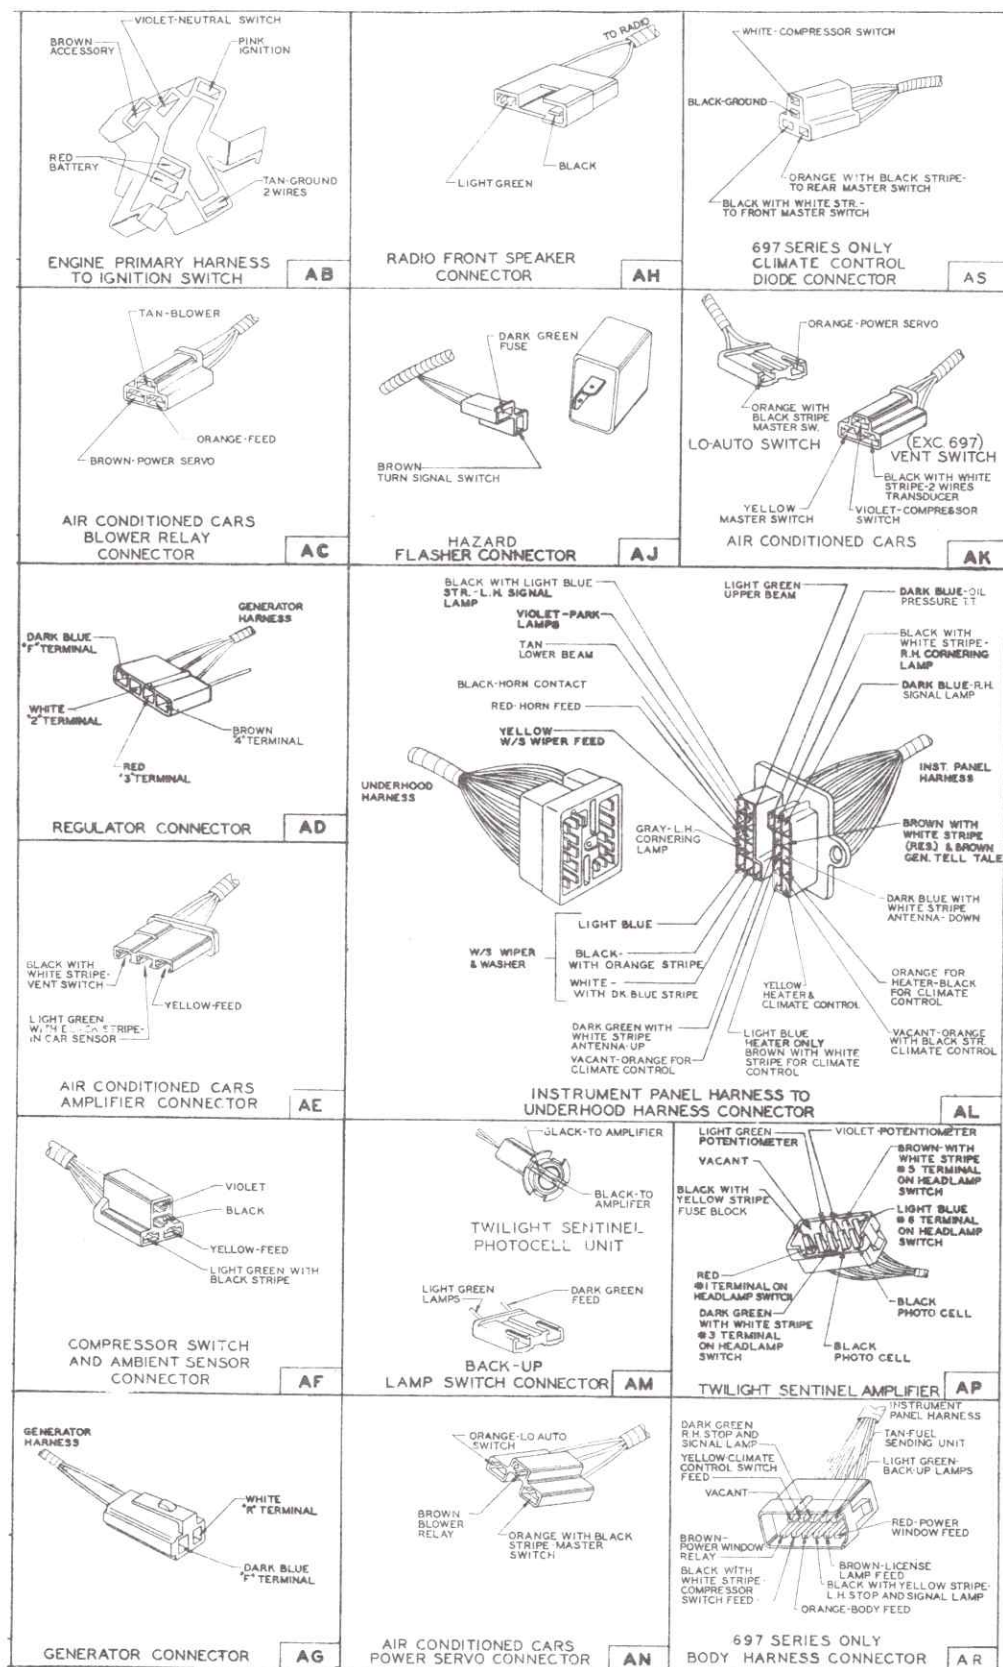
Chassis Wiring Connectors - 680, 681, 682, 683, 697 Styles
